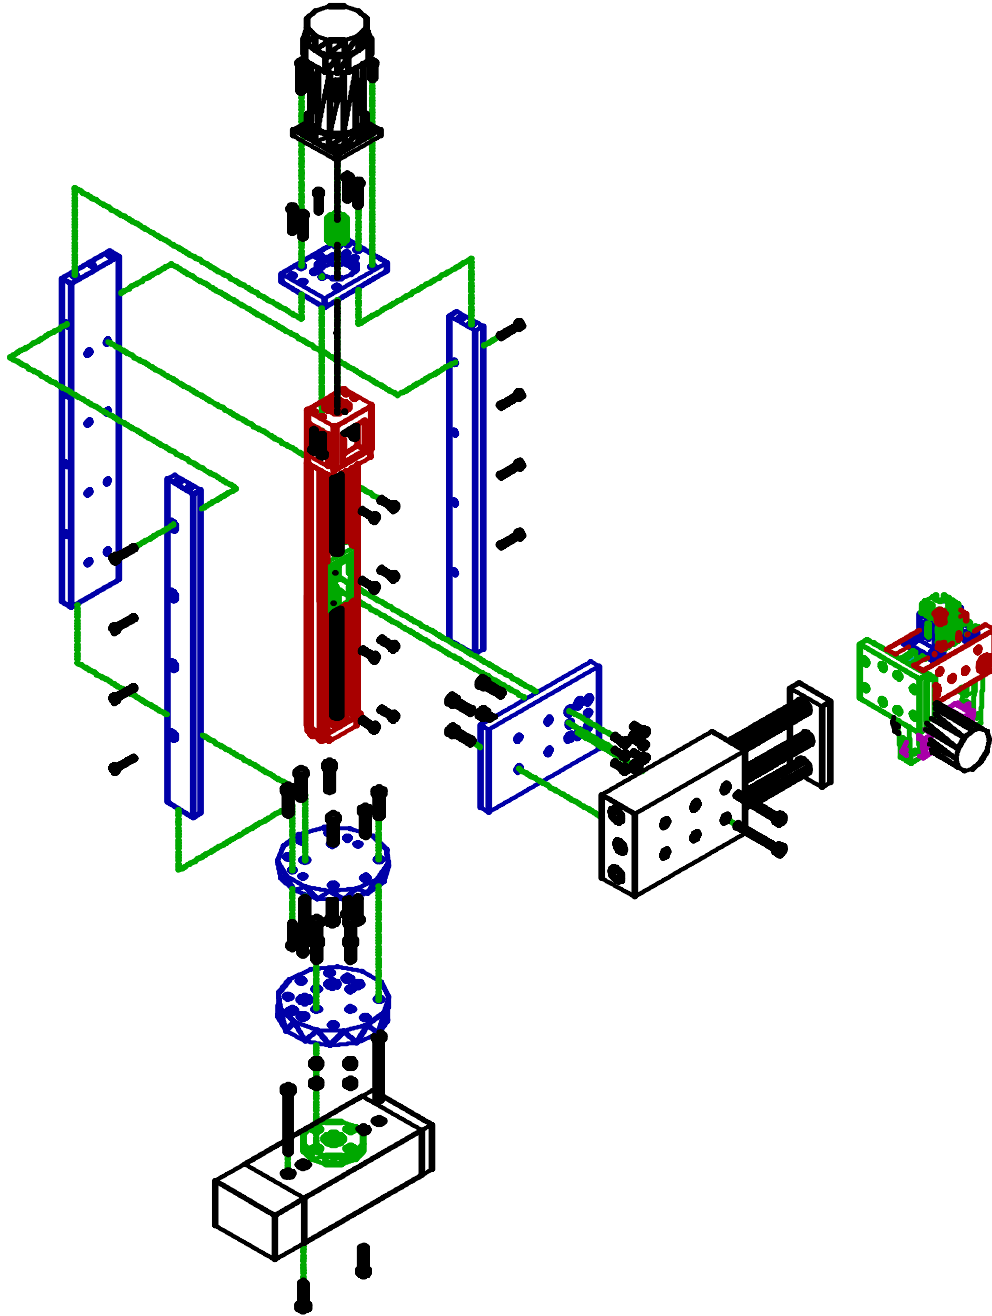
Exploded view and bill of materials of an assembly modelled
